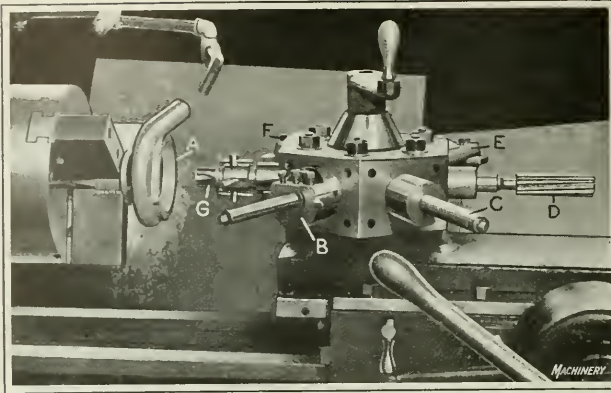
Tool Equipment of a Turret Lathe used for facing, boring, reaming, and tapping Water Pump Bodies
